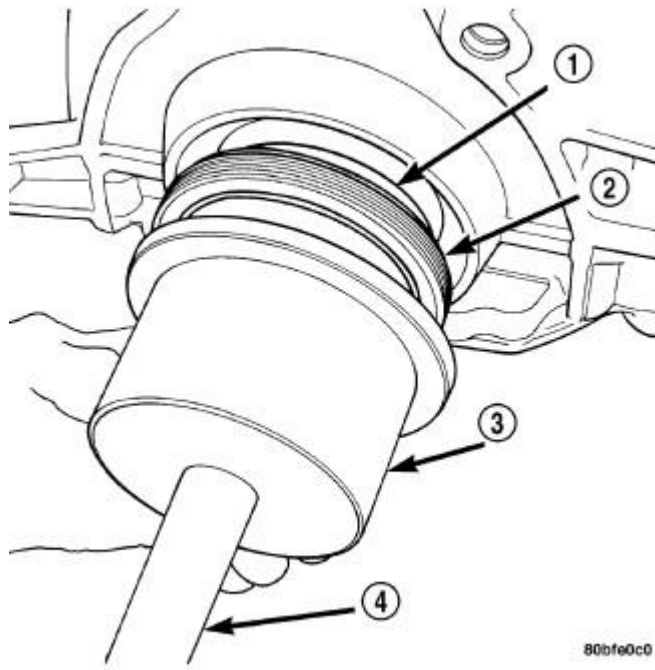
Crankshaft Seal and Special Tools 6926-2 AND C-4171
